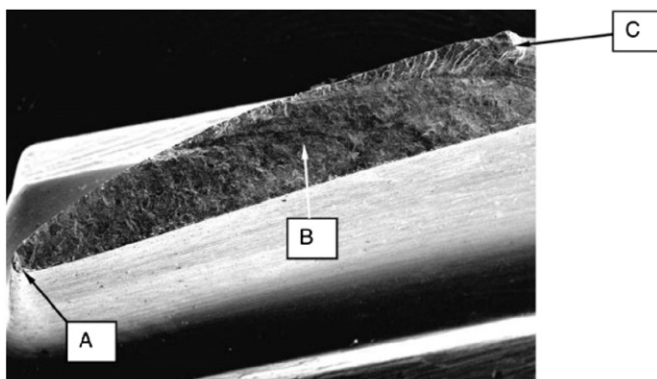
View of a fractured blade with marked crack origin zone (A), fatigue fracture area (B) and rupture zone (C) [76].
